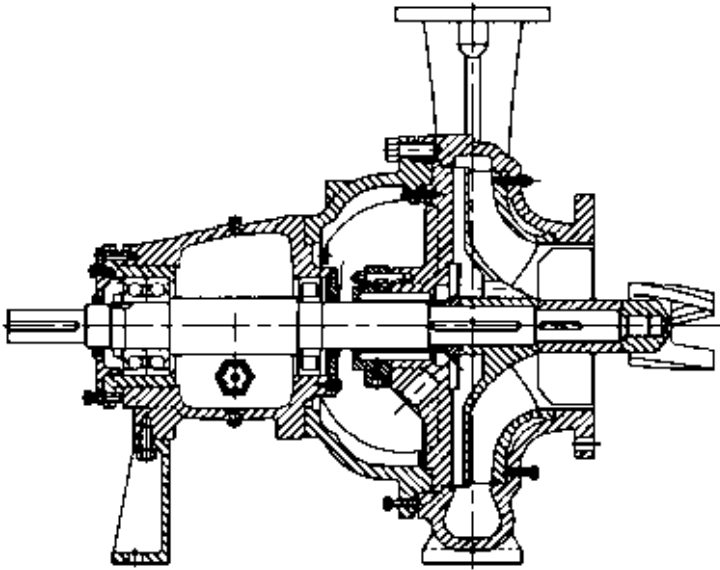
Medium consistency stock pump. (Courtesy ITT / Goulds Pumps, Inc.)
